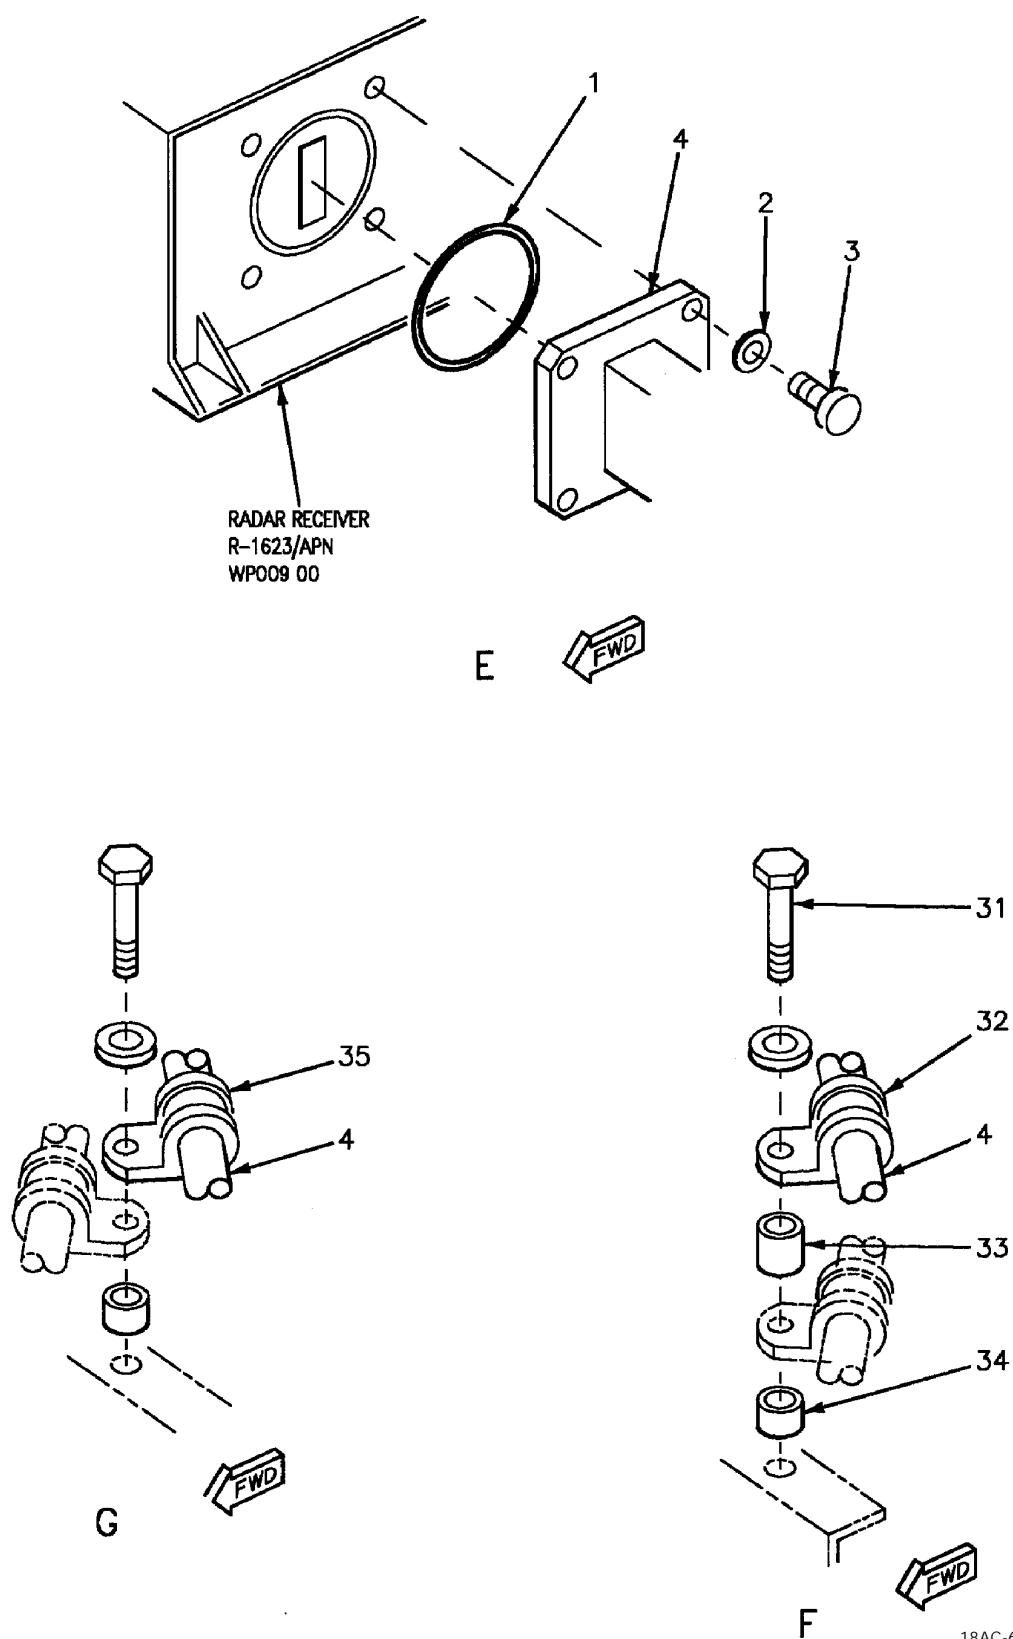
KA-Band Coax Cable/Waveguide Assembly (72W-B501 and 72W-B502) - 161702 AND UP (Sheet 4)
